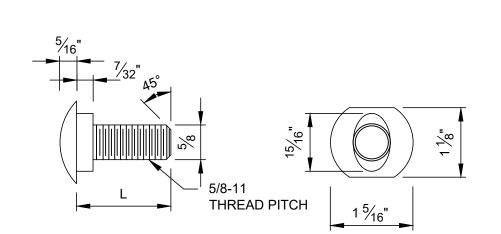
DETAIL OF RAIL SPLICE JOINT NOT TO SCALE
